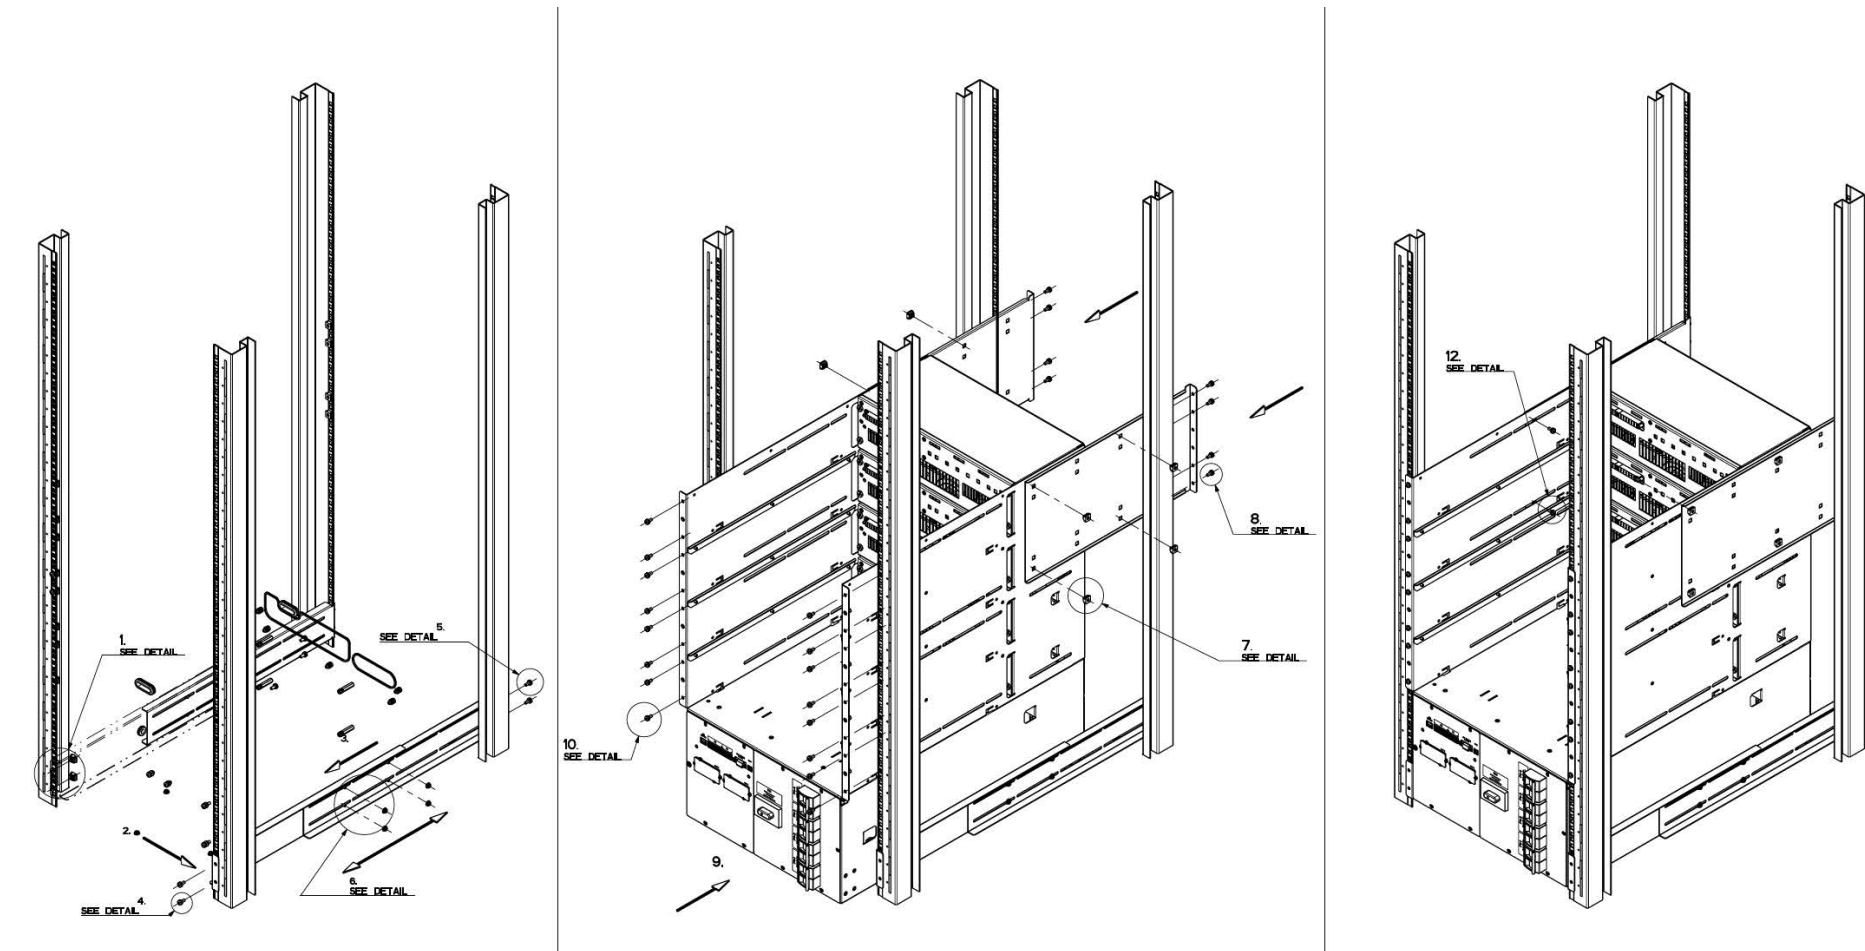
SCALE 1:2	DETAIL 4 SCALE 1:2	DETAIL 5 SCALE 1:2	DETAIL 6 SCALE 1:2	DETAIL 7 SCALE 1:2	DETAIL 8 SCALE 1:2	DETAIL 10 SCALE 1:2	DETAIL 12 SCALE 1:2
